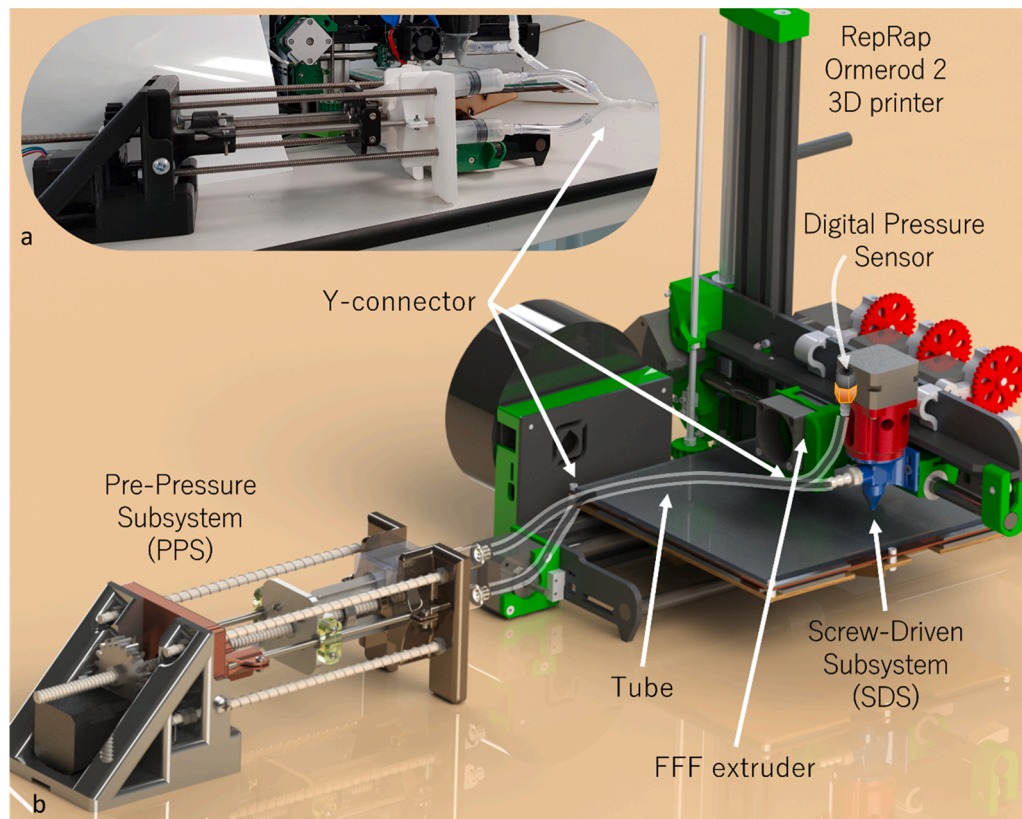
a) Fully assembled customized 3D printer with in-house DIW system, b) CAD representation of the custom 3D printer.
